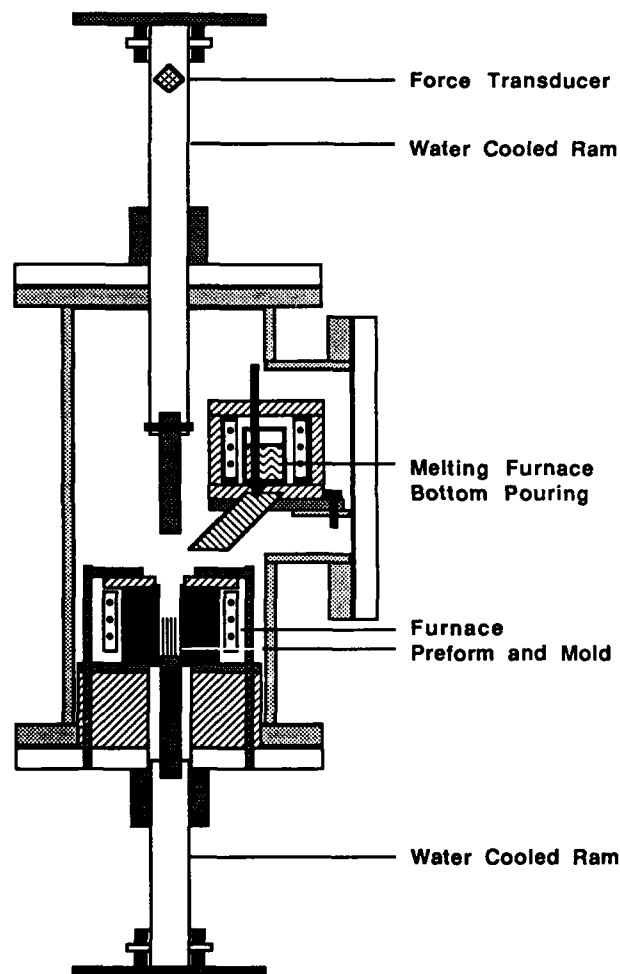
Experimental apparatus developed for low-pressure squeeze-casting.
